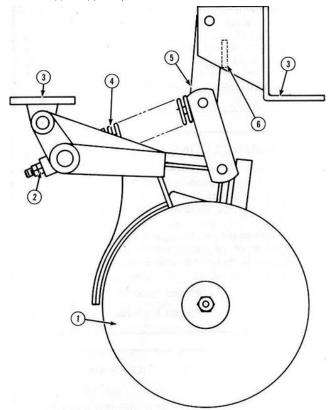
Double Disc Assembly: (1) Disc, (2) Adjusting Nut, (3) Frame Mounts, (4) Spring, (5) Link, (6) Stop.
